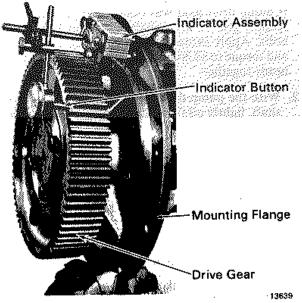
Checking Pump Drive Gear End Thrust
